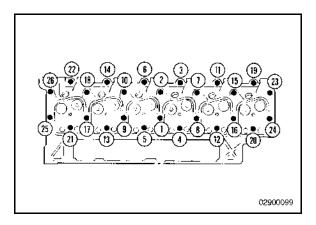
TIGHTEN THE SHORT CAPSCREWS
